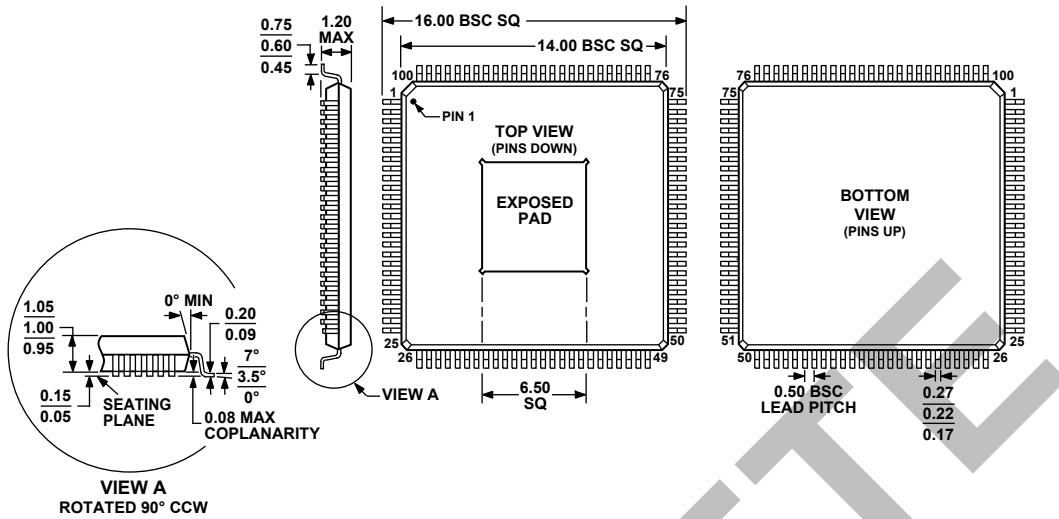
100-Lead Thin Quad Flat Package, Exposed Pad [TQFP\_EP]
